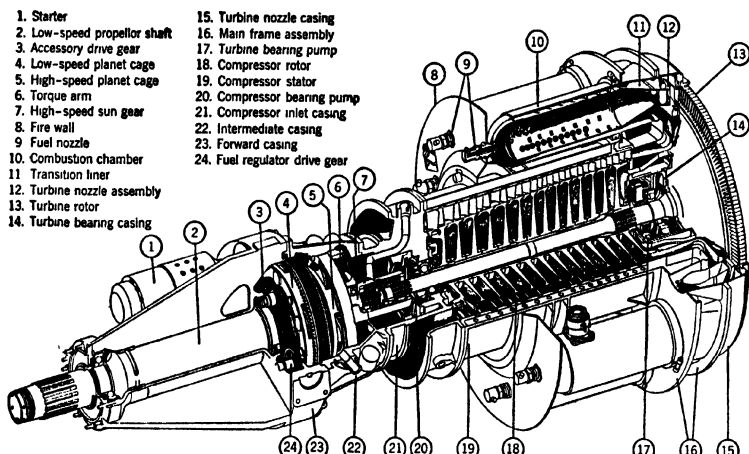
Cutaway view of propjet with axial-flow compressor. (Courtesy of General Electric Co.)
